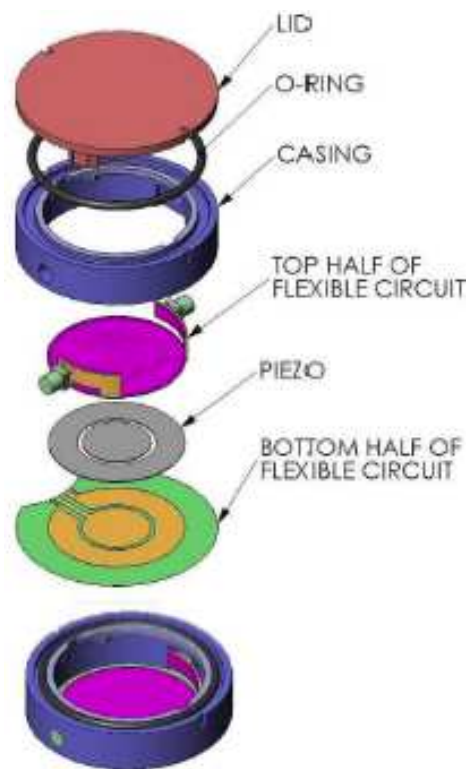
Exploded view of M.E.T.I.-Disk 2 node.
